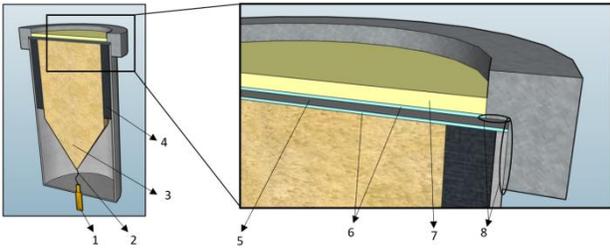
Cross section view of transducer design (left) and detail of the connections (right)
